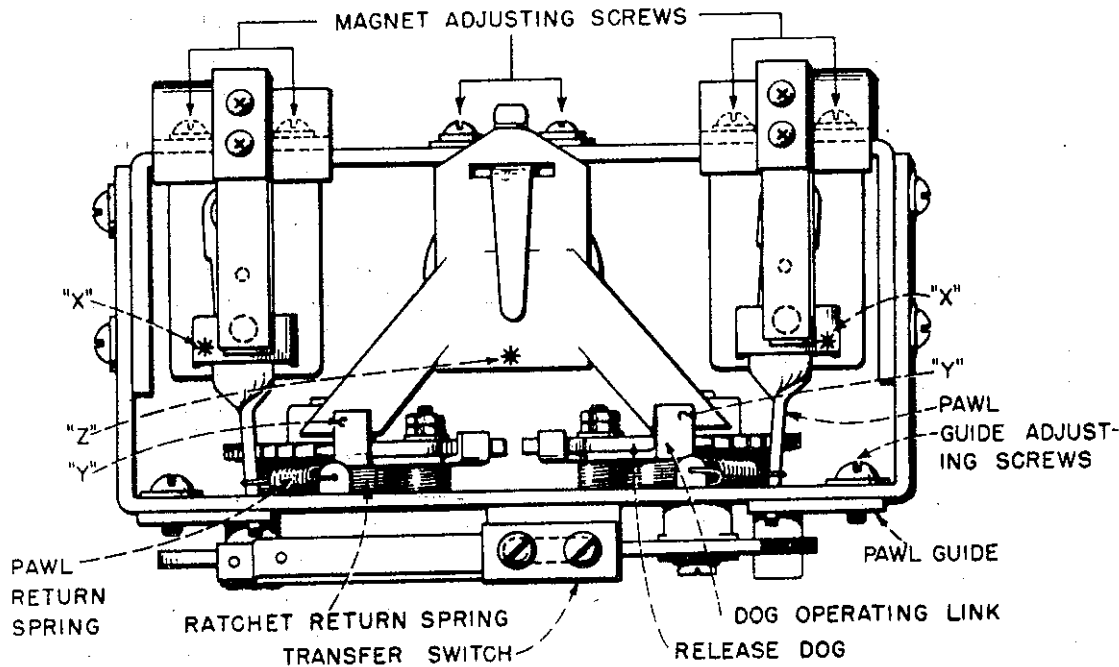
TOP VIEW OF STEP SWITCH ASSEMBLY
